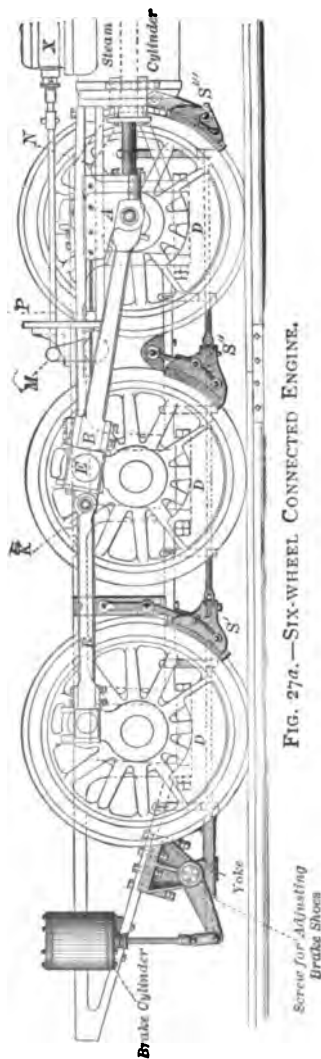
SIX-WHEEL CONNECTED ENGINE.
